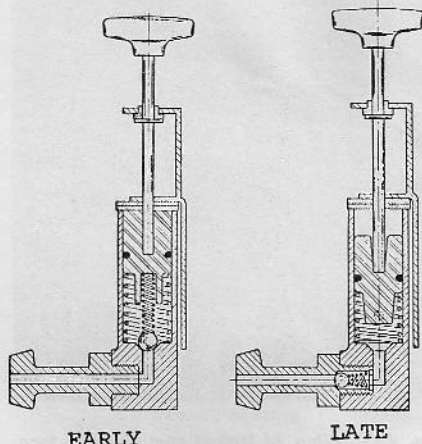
Cross section of early and late type manual oiler pumps. Most saws are equipped with late type.
